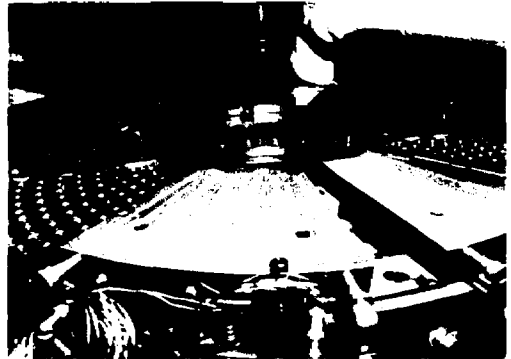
Motor generator No. 2 thrust bearing segments. (87E1037)
